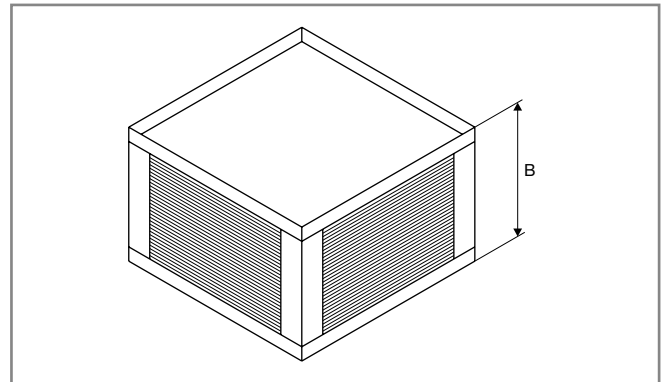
Schematic view of a plate heat exchanger installed in horizontal position
